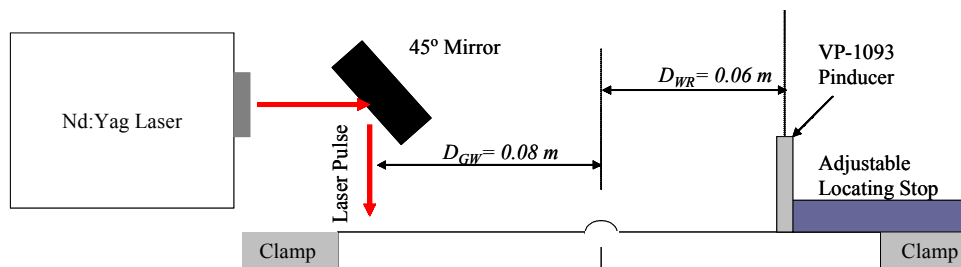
Experimental Setup to Measure Weld Penetration Depth using RGLS and RGLL waves
